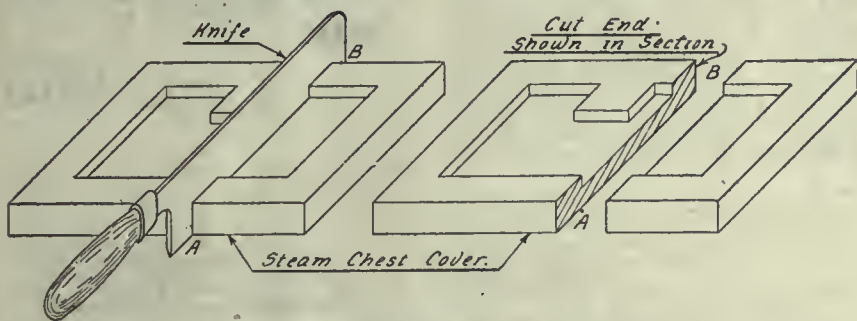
CUTTING A SECTION FROM STEAM CHEST COVER
